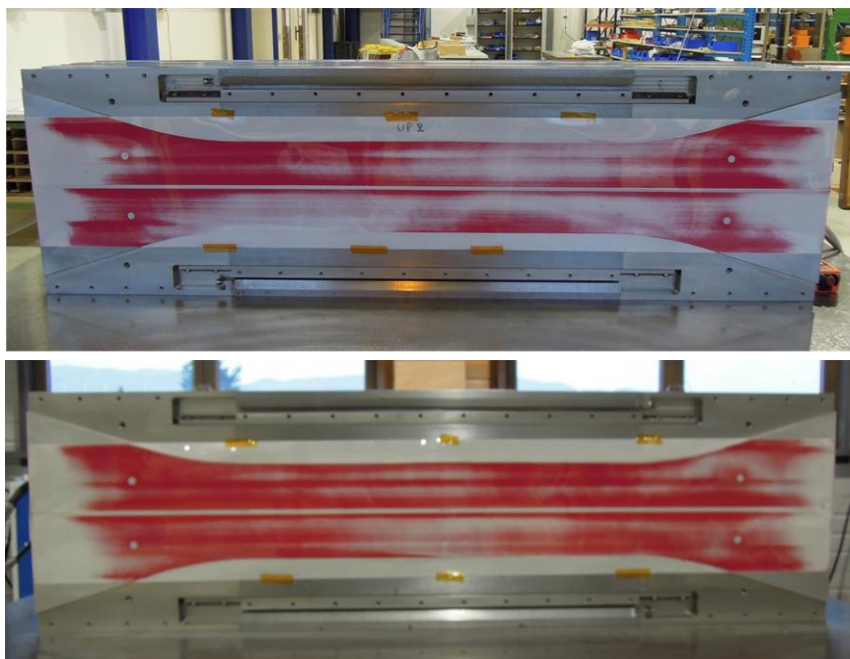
Pressure-sensitive paper on contact surfaces of dummies and h-pads.
